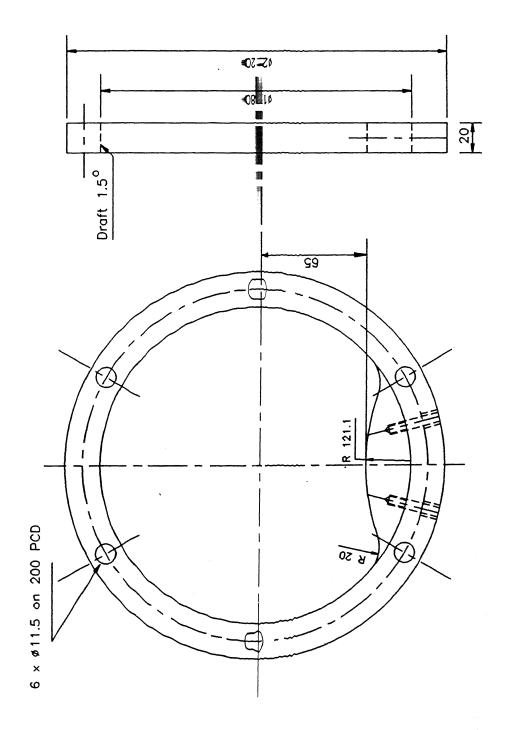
Mould Plate for Convex —concave Surfaced Ring
